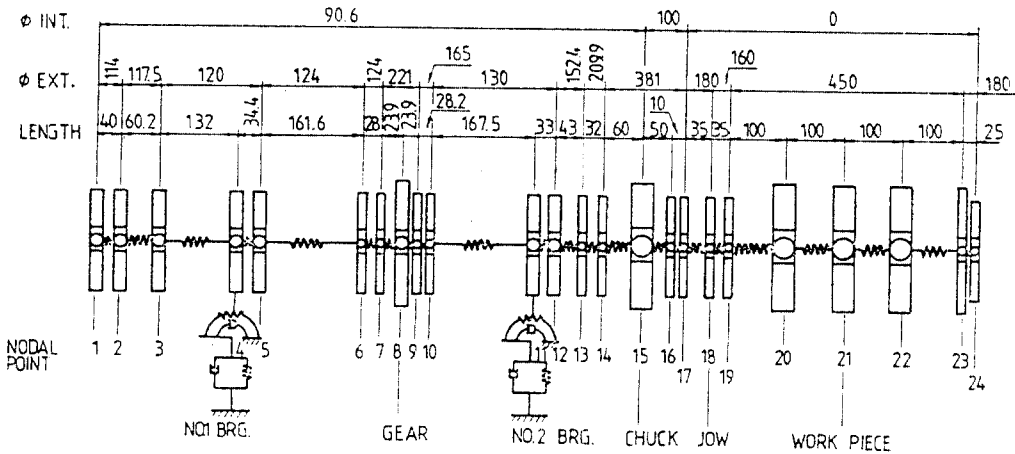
(b) Mathematical model of lathe head stock with a work piece
